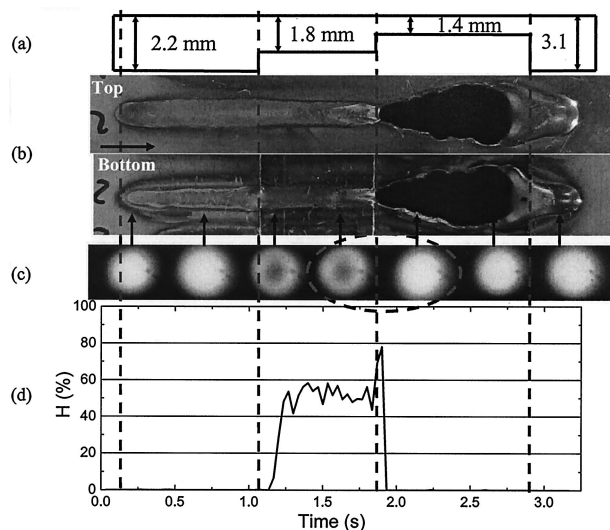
(a) Longitudinal cross section of the Inconel stepped workpiece. (b) Photographs of top and bottom surface when welding bead-on-plate Inconel at constant laser power and at a speed of 0.9 m/min. (c) Keyhole images recorded at 30 Hz. (d) Keyhole opening depth coefficient H . The region around the highlighted images is shown in more details in Fig. 10.
